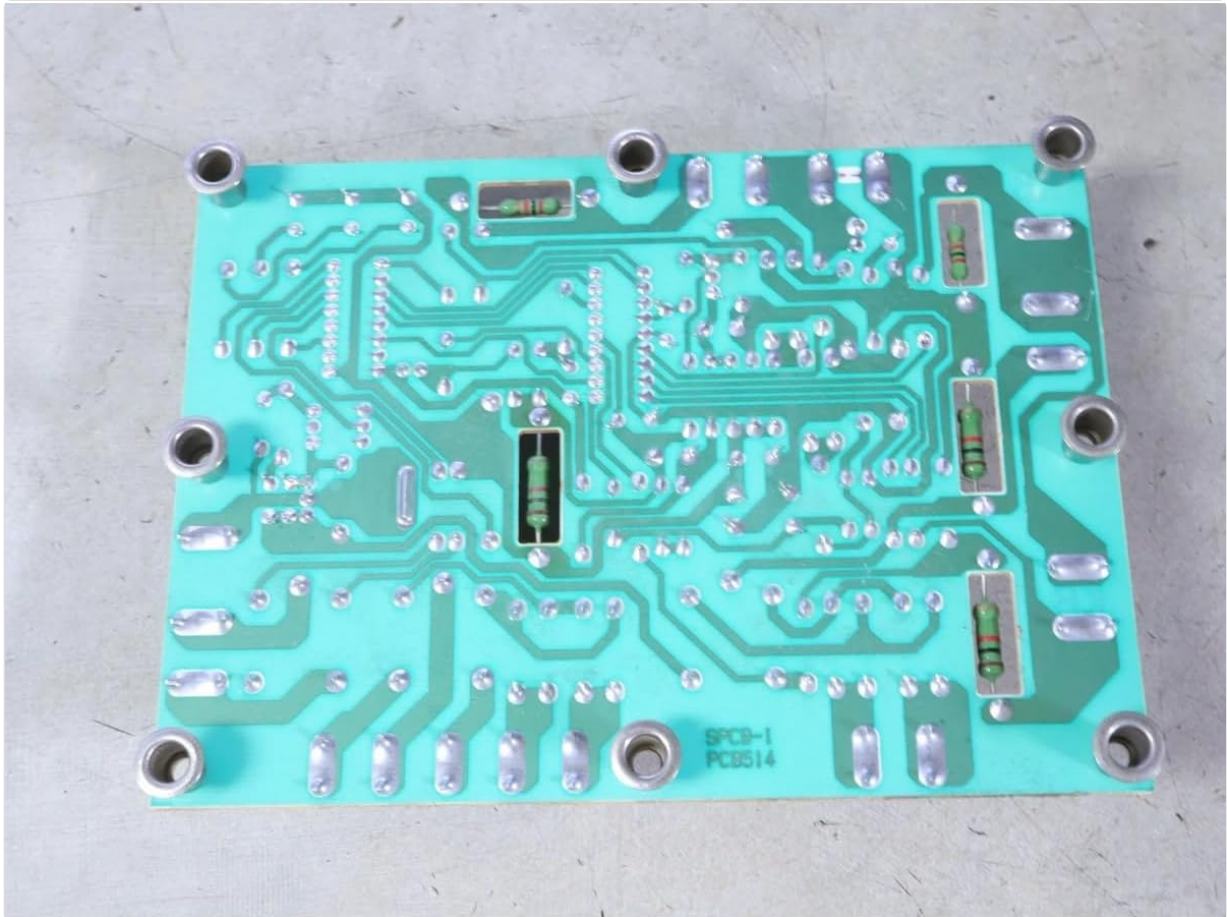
Bottom view of the control board, illustrating the printed circuit board (PCB) traces and solder connections. This image is useful for verifying the board's construction and integrity.
